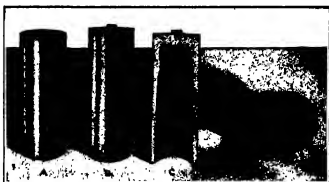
Examples of shrapnel forgings turned out on a power forging machine.
